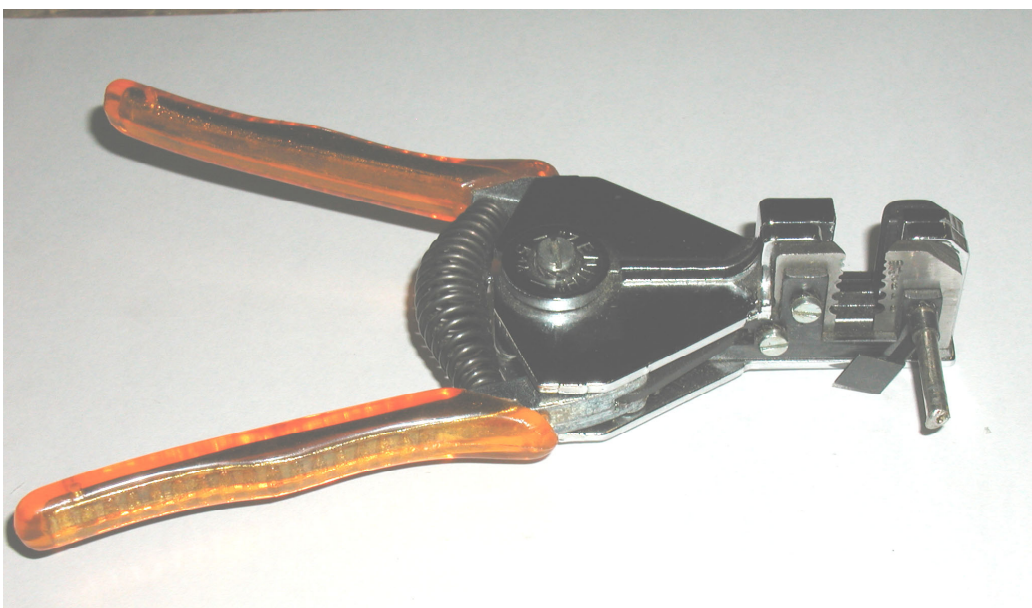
Stripping tool for stripping off safely the carbon discharge screen
